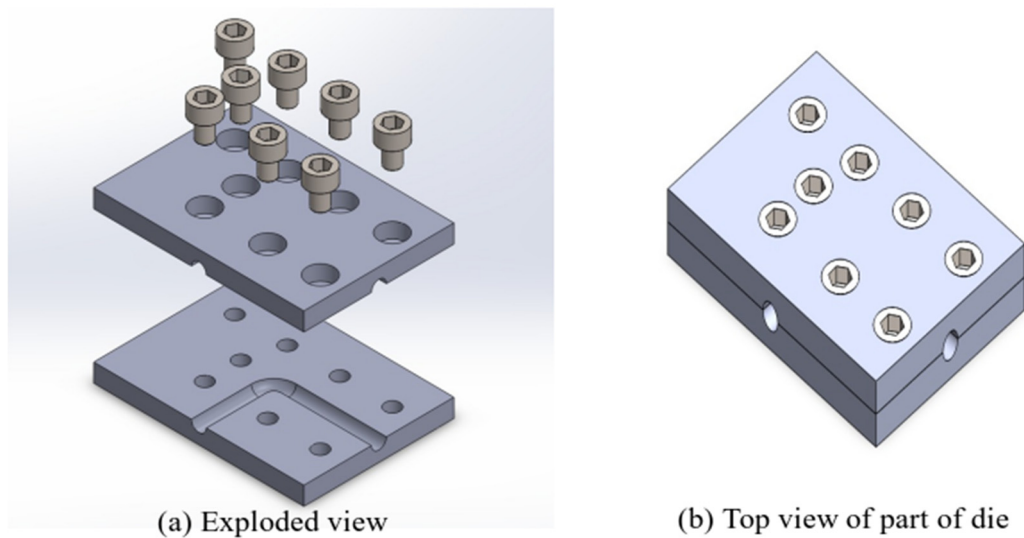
(a) View of an explosion. (b) A top view of a die component.
